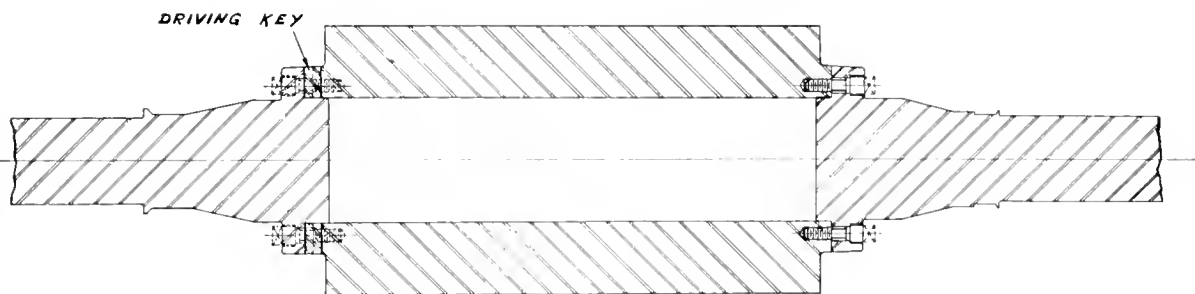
Three-part Rotor Construction Employed in the Largest Six-pole Machines
